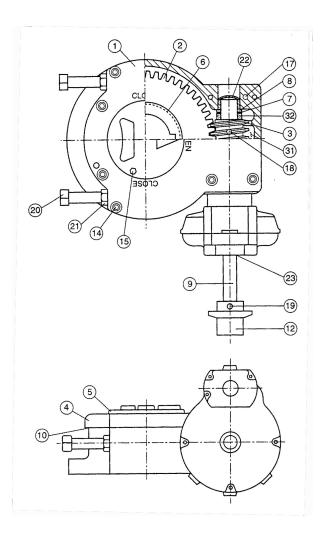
GEAR ACTUATOR CONSTRUCTION
